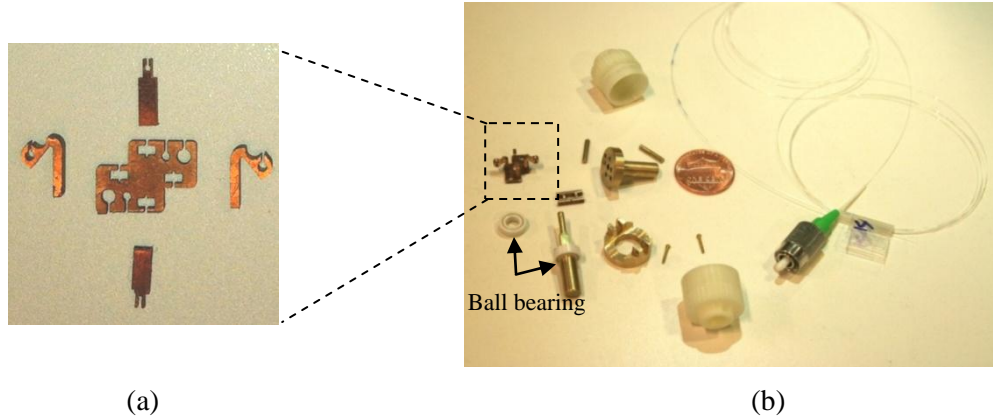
(a) Different pieces of the active element were fabricated by wire EDM and were glued to each other, (b) The exploded view of the final fabricated parts (see Figure A.3a for labels of each part).
